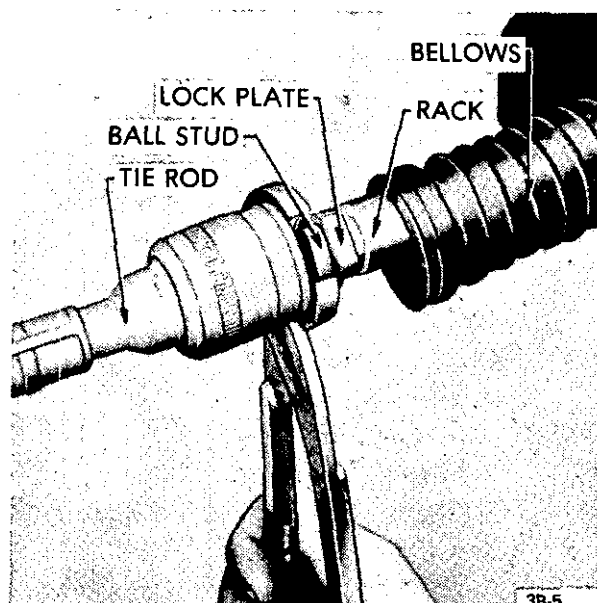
B-5 Bending Lock Plate Over Ball Stud . GT
